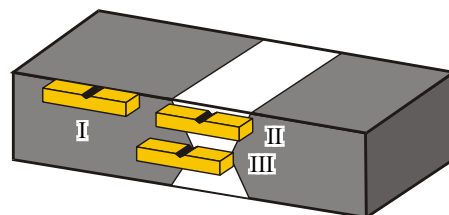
Scheme of notch locations in a welded joint, /11/.
